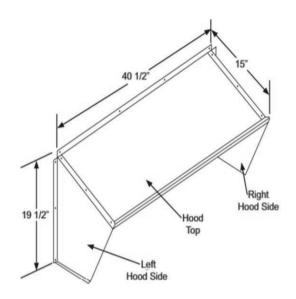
CRBARHOD001A00 Hood Sides and Top
